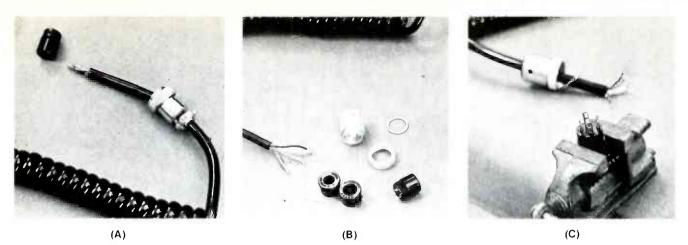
Mike connectors are manufactured in many different variations. (A) This one comes with the screw-adjustable strain relief assembled ready to be slipped over the cable before the wires are soldered. Another kind (B) must be assembled as you go. (C) After the parts are installed on the cable, the wires are soldered to the connectors. Soldering is quicker and less-susceptible to wiring errors if you hold the connector block in a vise or vise-grip pliers.
